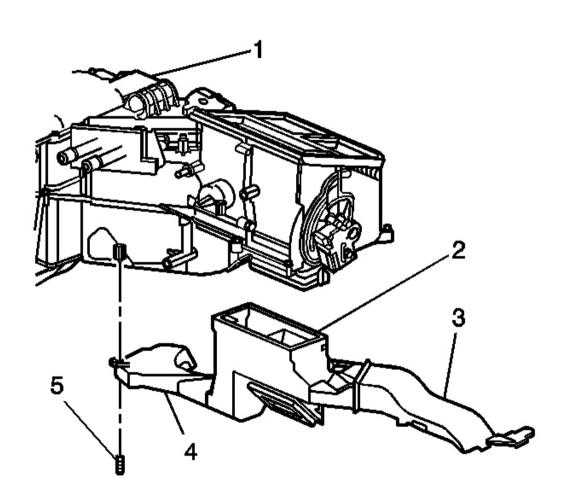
Floor Air Outlet Duct Courtesy of GENERAL MOTORS CORP.
